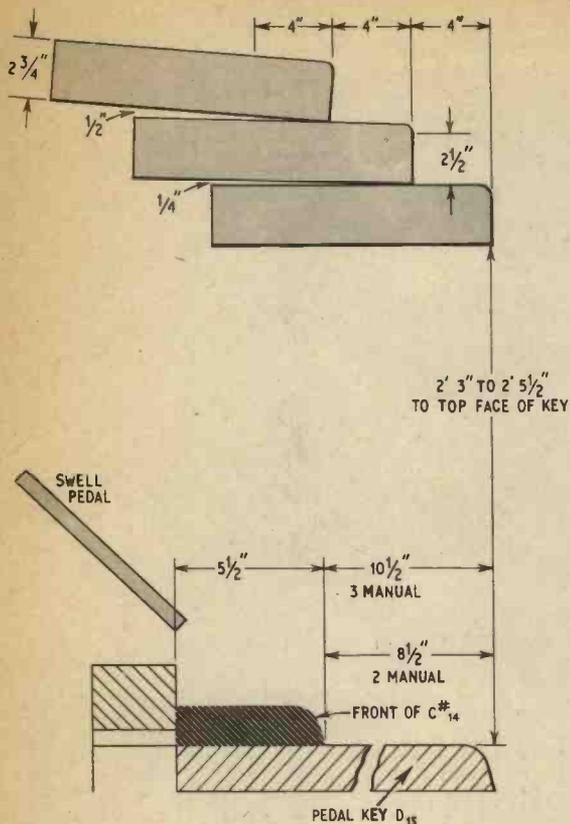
This sectional drawing shows the critical dimensions in a three manual console
